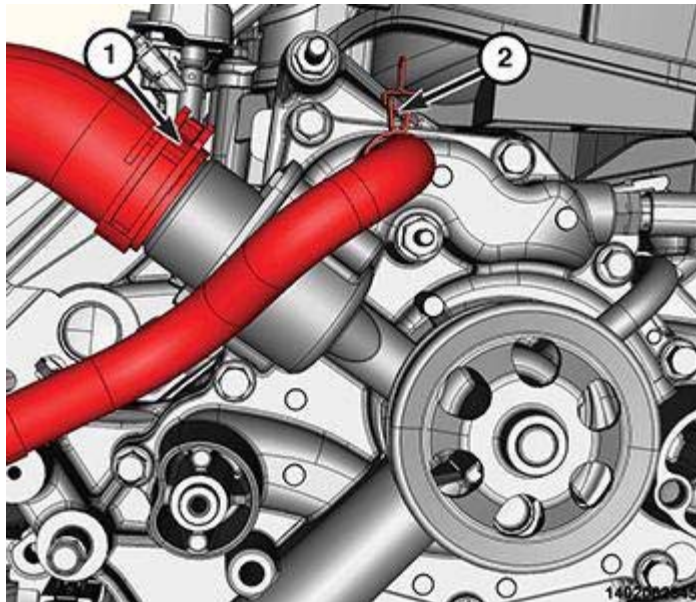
Upper Radiator Hose Clamp & Oil Cooler Hose Clamp
